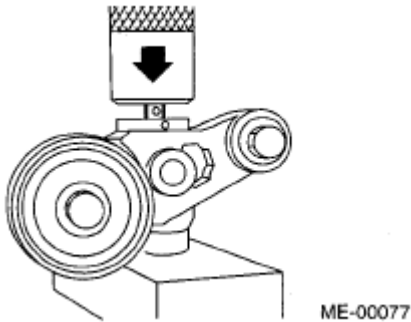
Aligning Adjuster Rod With Stopper Pin Hole
